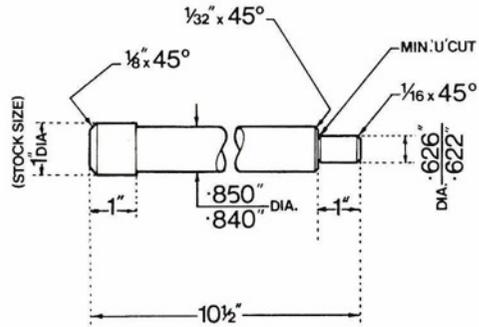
Dimensions for making up swinging arm bush sleeve drift.
